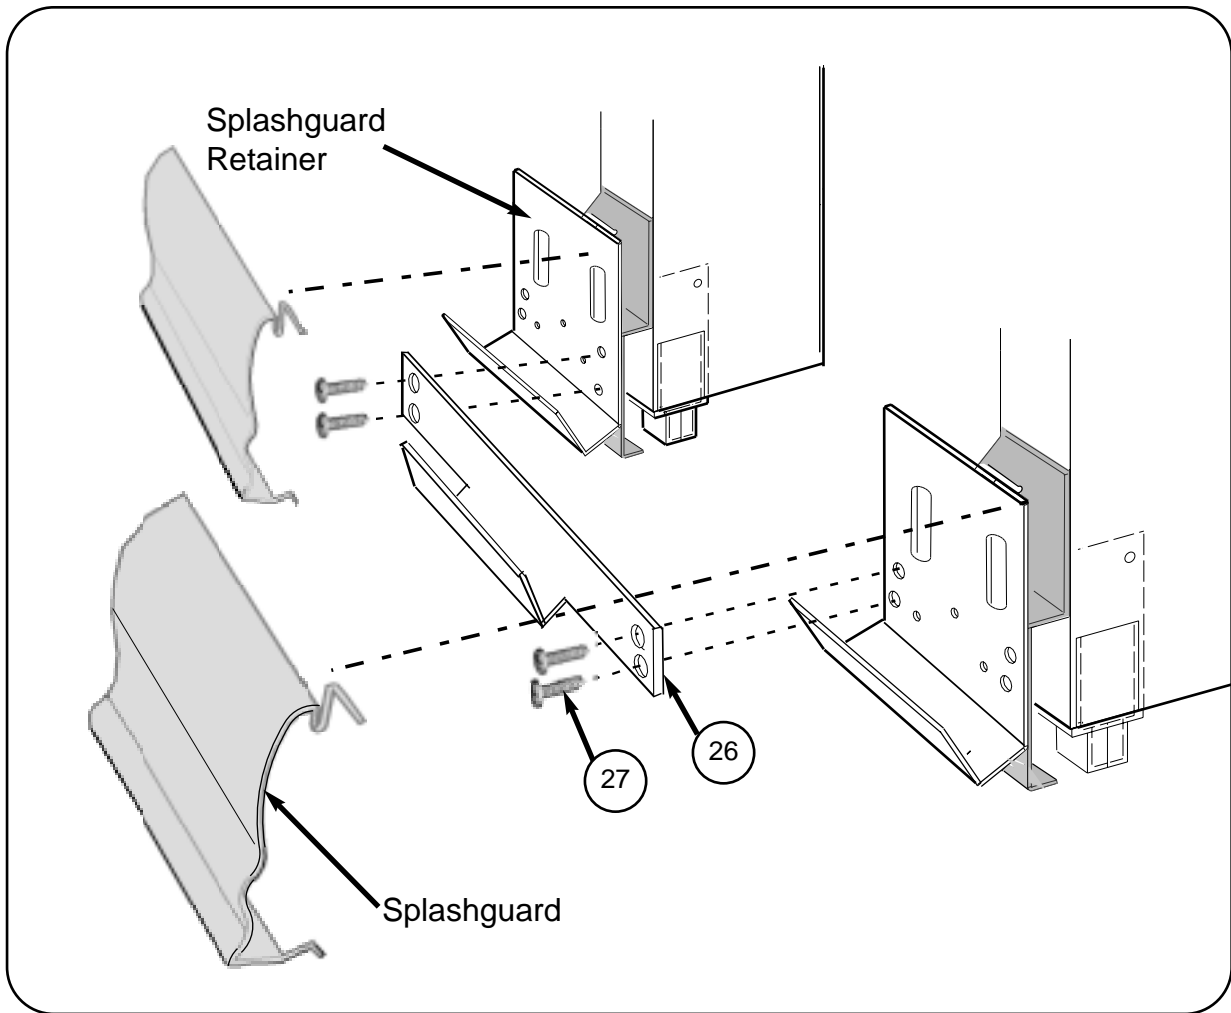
Installing the Splashguard Joining Bracket and Splashguard
